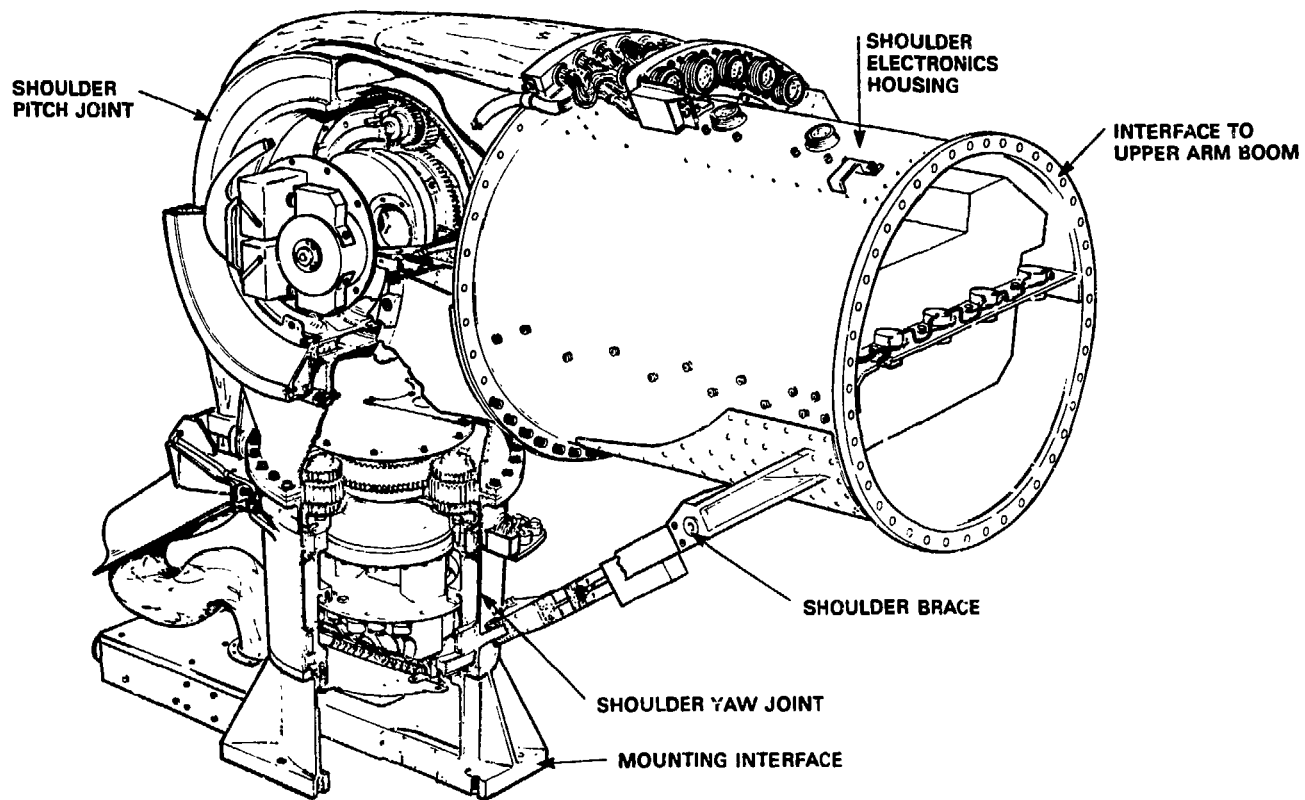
SRMS SHOULDER JOINT ASSEMBLY
